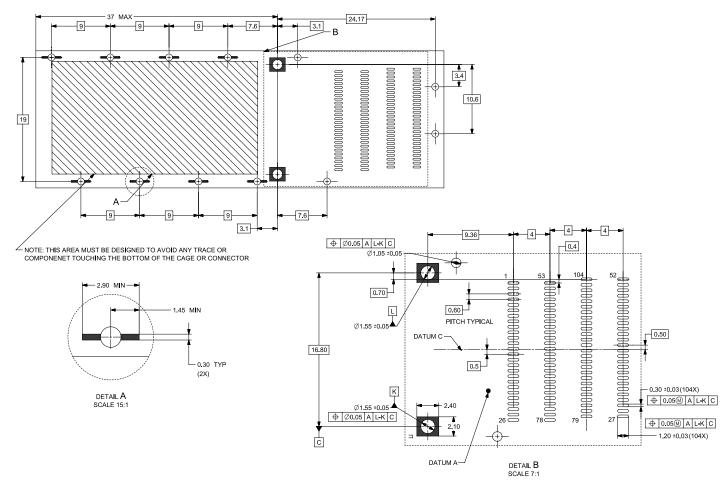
QSFP-DD1600 reduced pad SMT host PCB layout
